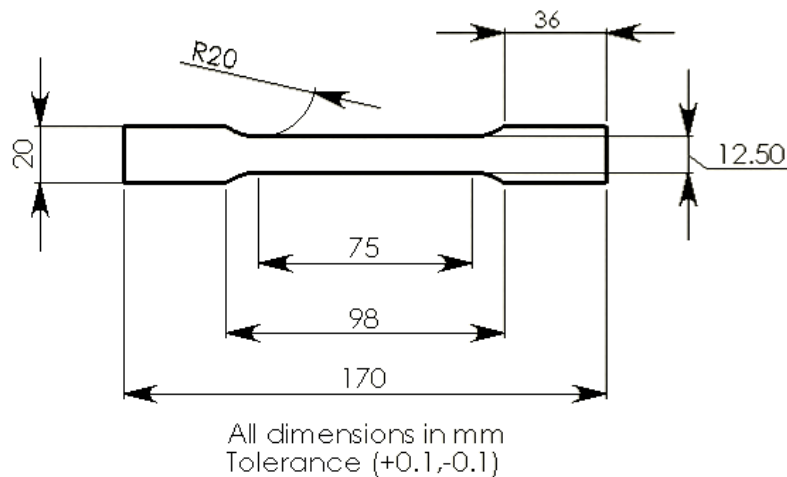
Tensile test specimen dimensions in accordance with BS EN 10002 – 1:2001
